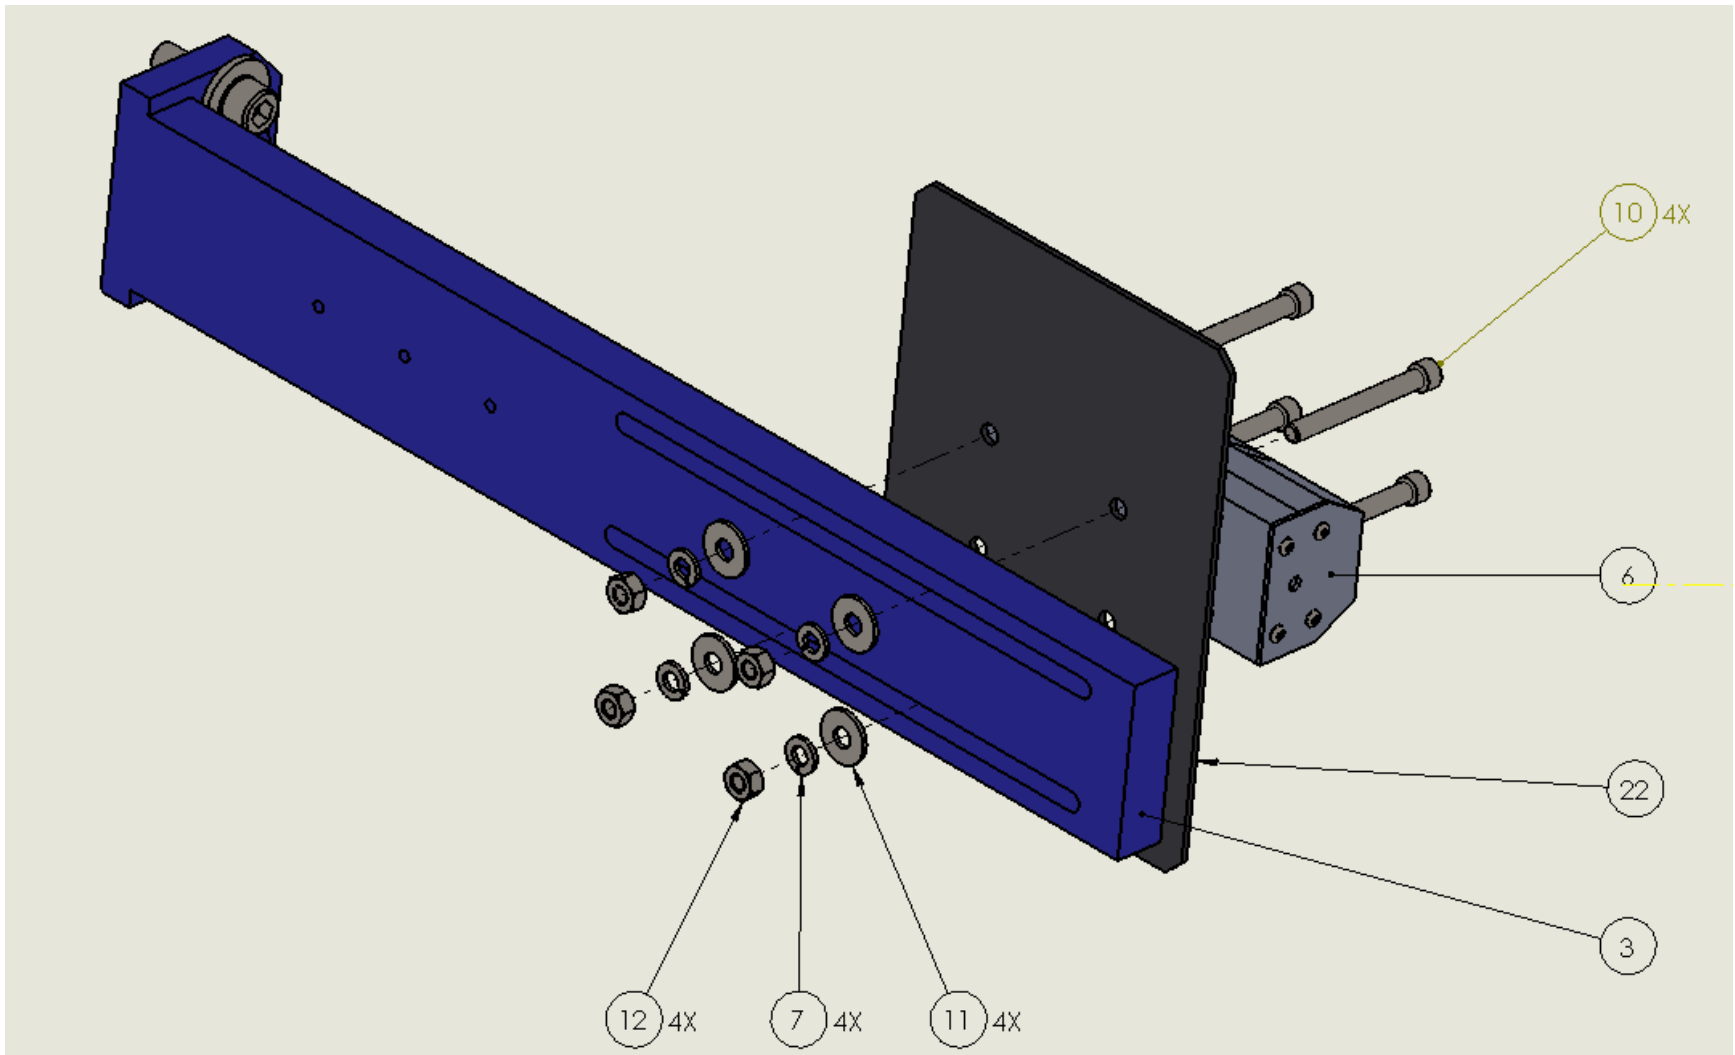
Assembly of TL102AL light into side mounting bracket with heat sink
